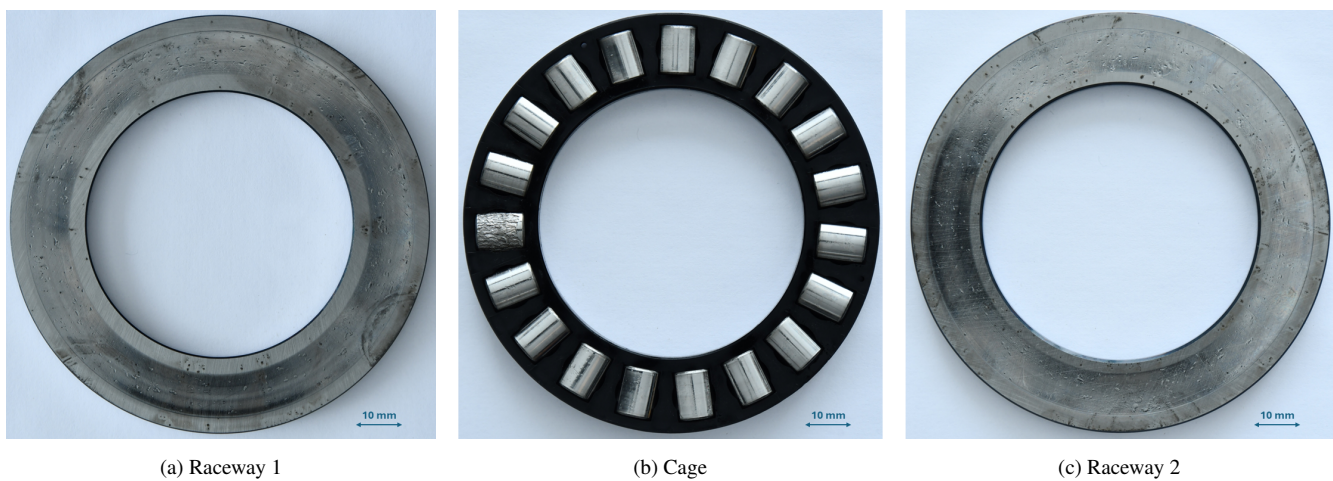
Pictures of bearing components for Bearing 2 of T01. Refer to Table 5 for designation of tests. The outer diameter of the bearing is 95 mm and the diameter and length of the rollers are both 11 mm.
